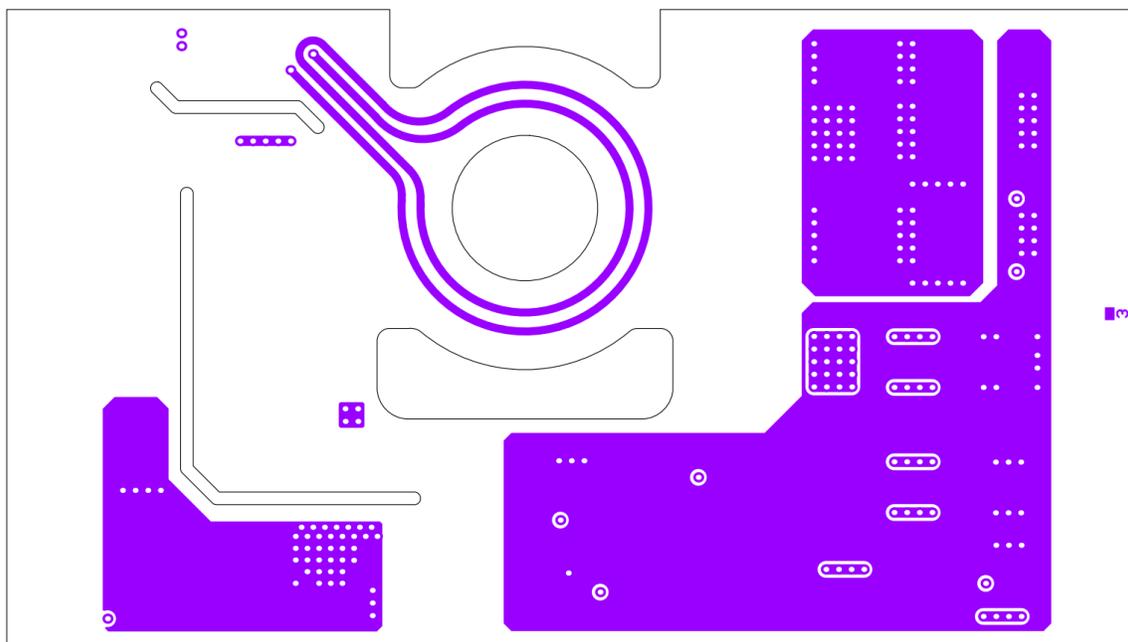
DER-1039Q Top Layer PCB Layout.
